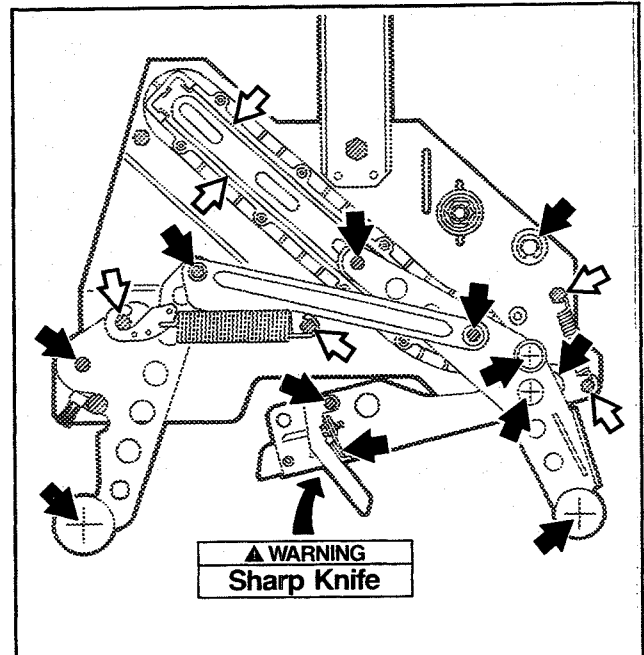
Lubrication Points, Upper and Lower Taping Heads
